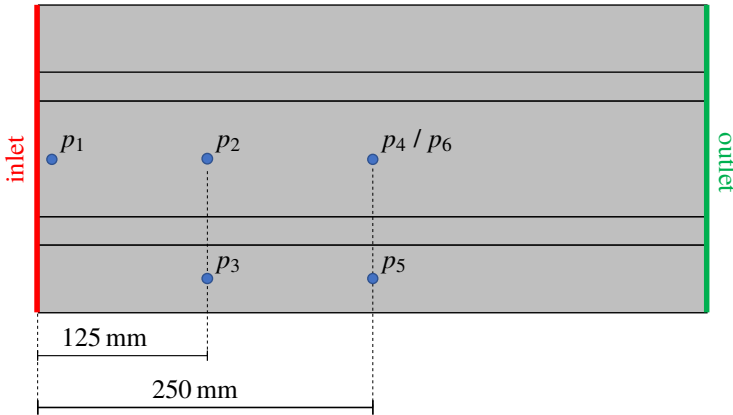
Pressure sensor positions in the RTM tool; all sensors except for p_6 are located in the lower mold part
